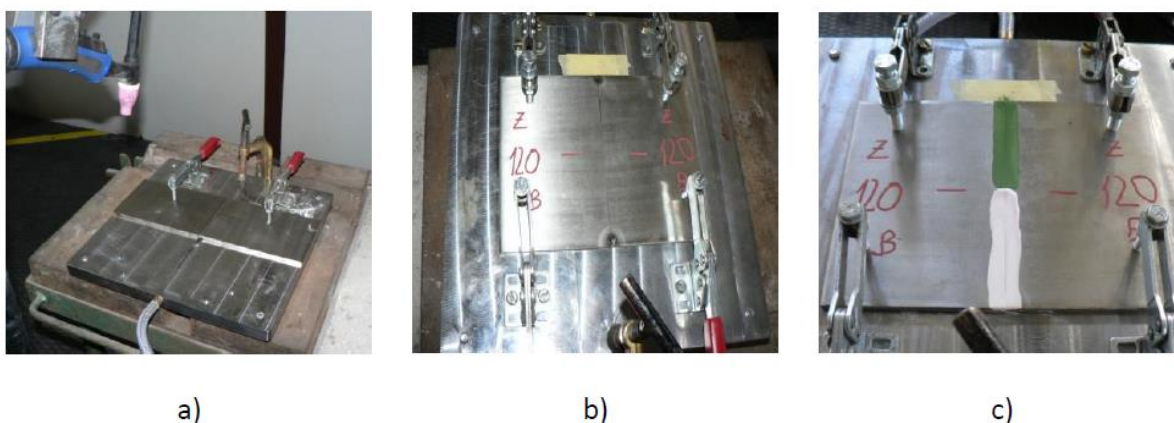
Clamped weldments before welding; a) TIG process, b) ATIG process – attaching of the weld plates by clamps (c) ATIG process weldment with active fluxes B and Z
